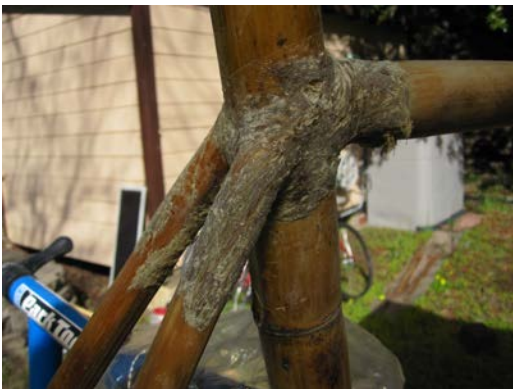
Second wrapping of upper seat-tube joint, after sanding.
